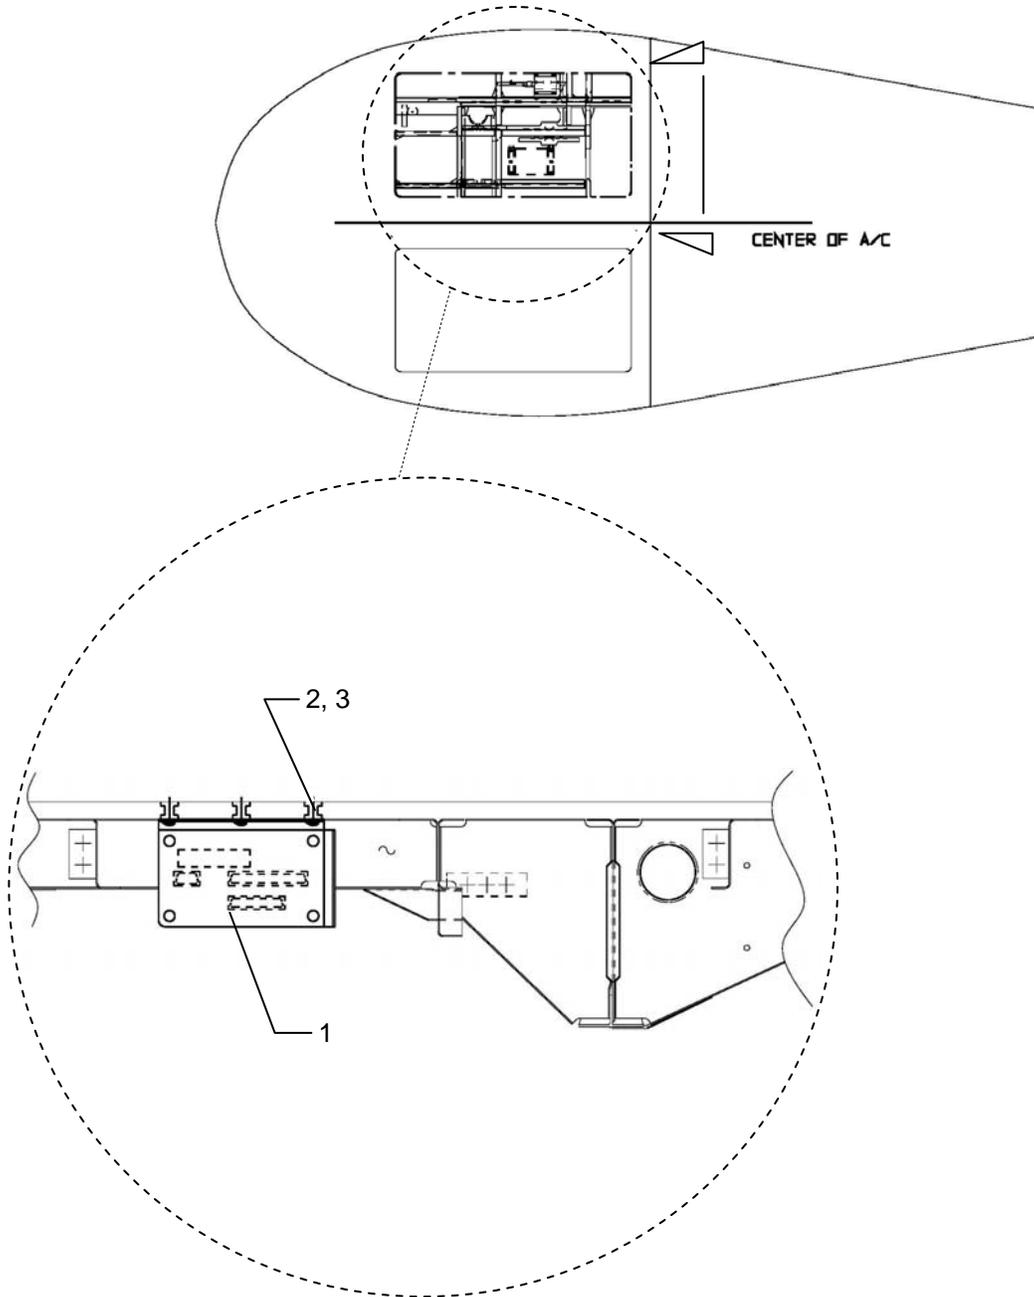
Fuse Panel and Fast Slave Switch Location
